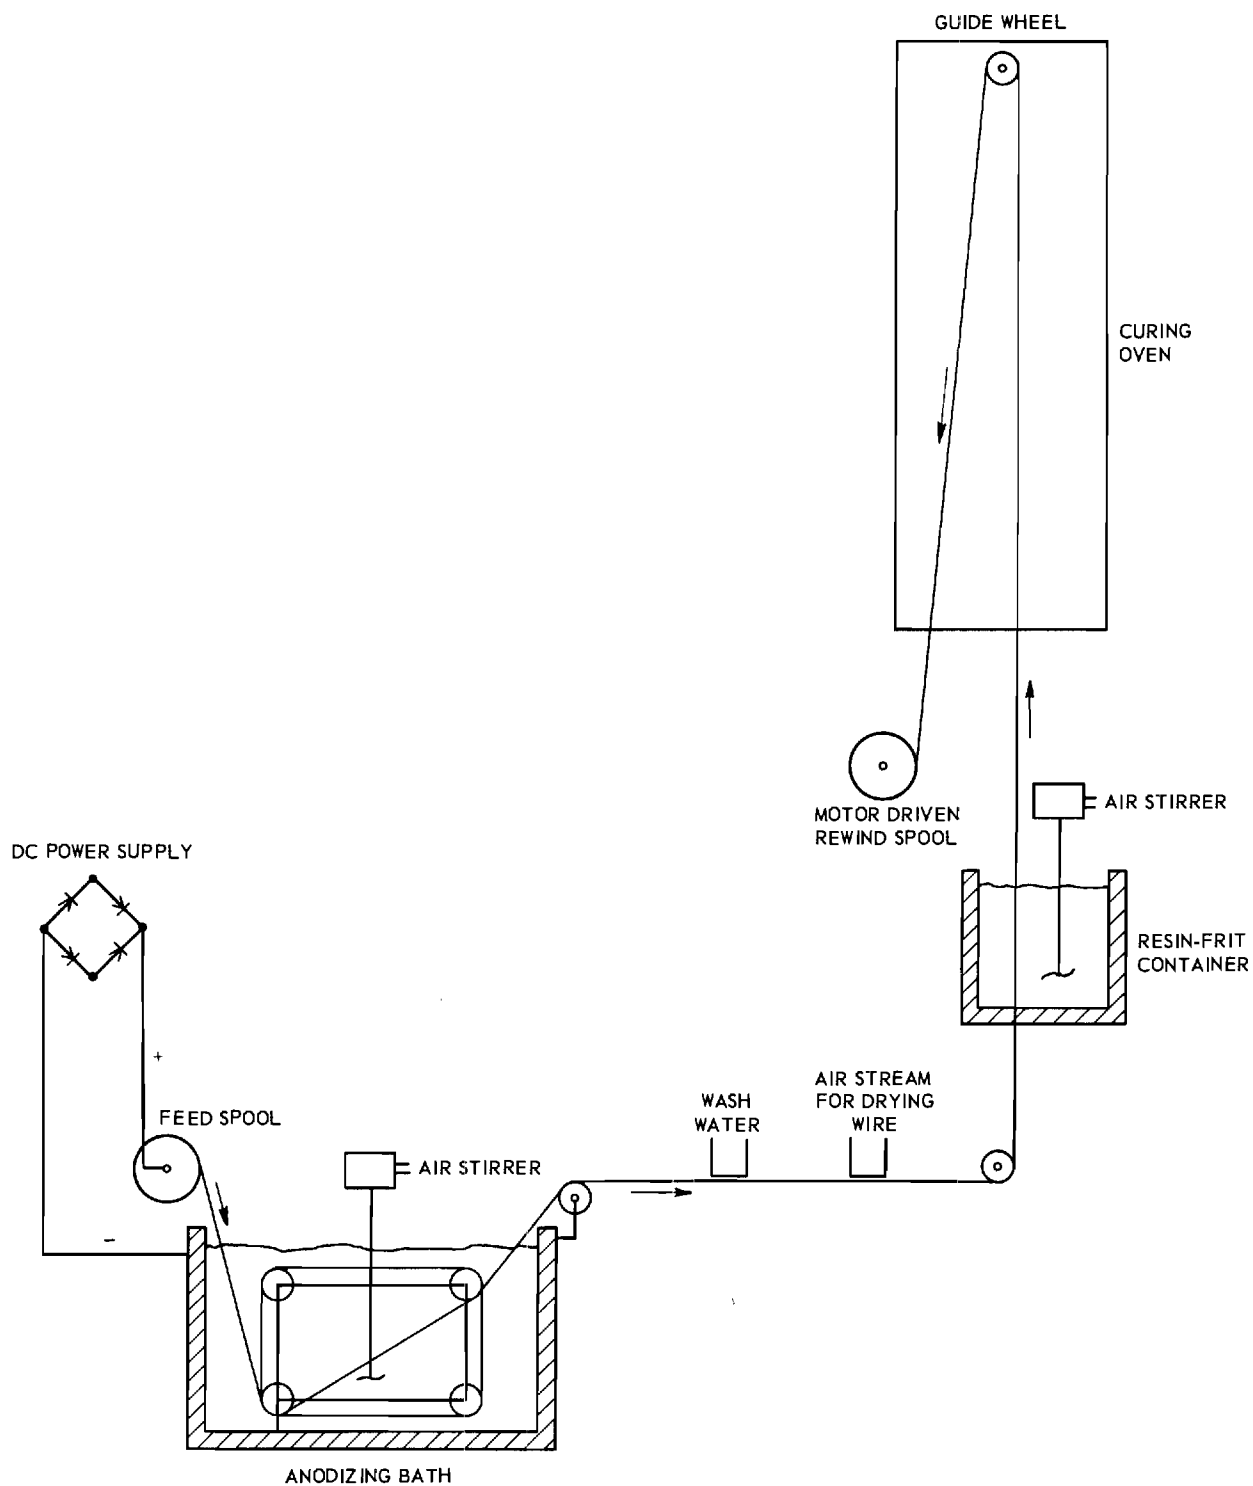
Schematic Sketch of Equipment for Continuously Anodizing and Coating Wire with Frit-Resin Coatings.
